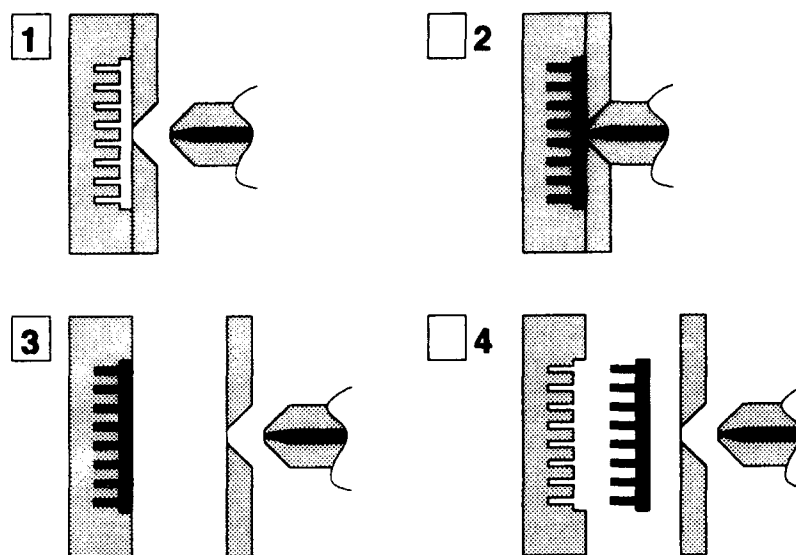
Schematic description of the injection molding process for 1-3 PZT preforms. (1) Hot wax-ceramic mixture in nozzle. (2) Injection of mix into mold. (3) Mix cools and forms solid part. (4) Net shape 1-3 preform is ejected from mold.
